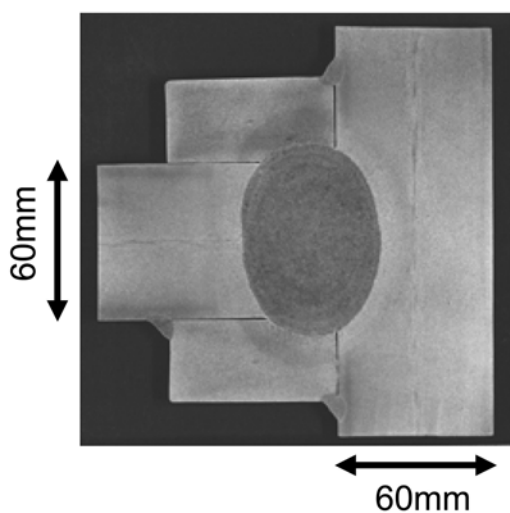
Example of macrostructure of the welded joint.
